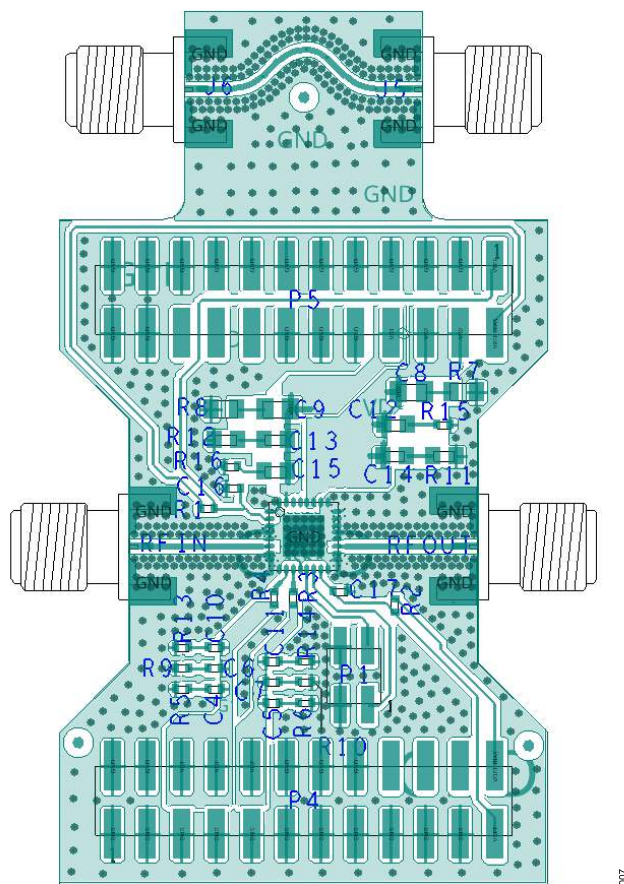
ADPA1106-EVALZ Assembly Drawing (J6 and J5 Not Installed)
